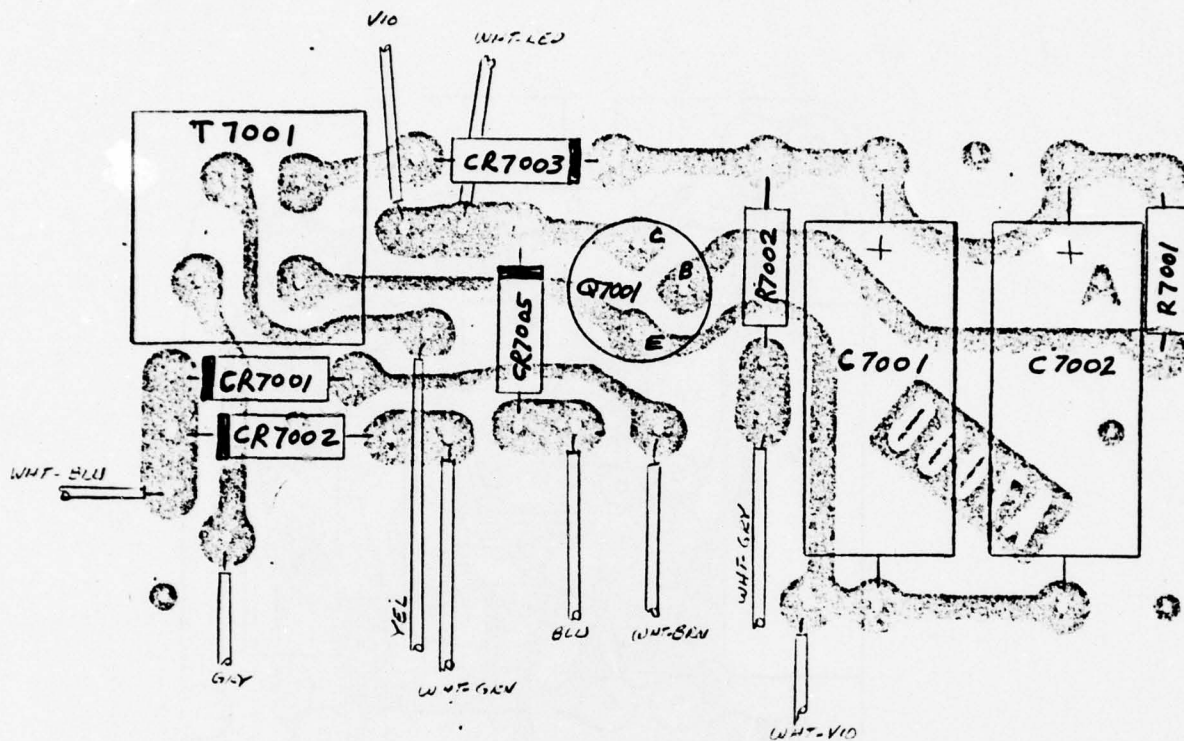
P.C. BOARD LAYOUT FOR THE A7000A NULL SWITCH ASSEMBLY
